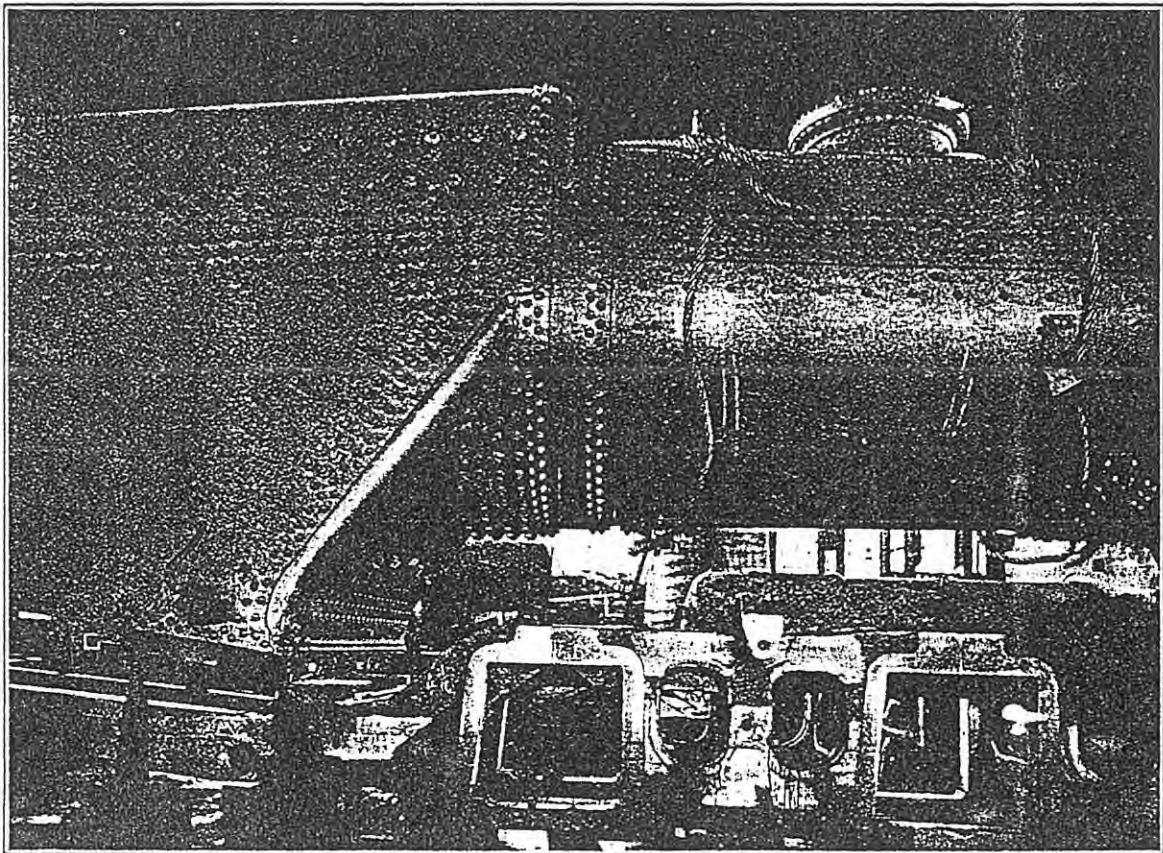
Showing Firebox-Boiler Barrel Connection by One-Piece Pressing.
